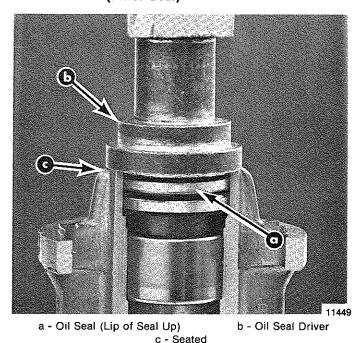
Propeller Shaft Oil Seal Installation (Inner Seal)
